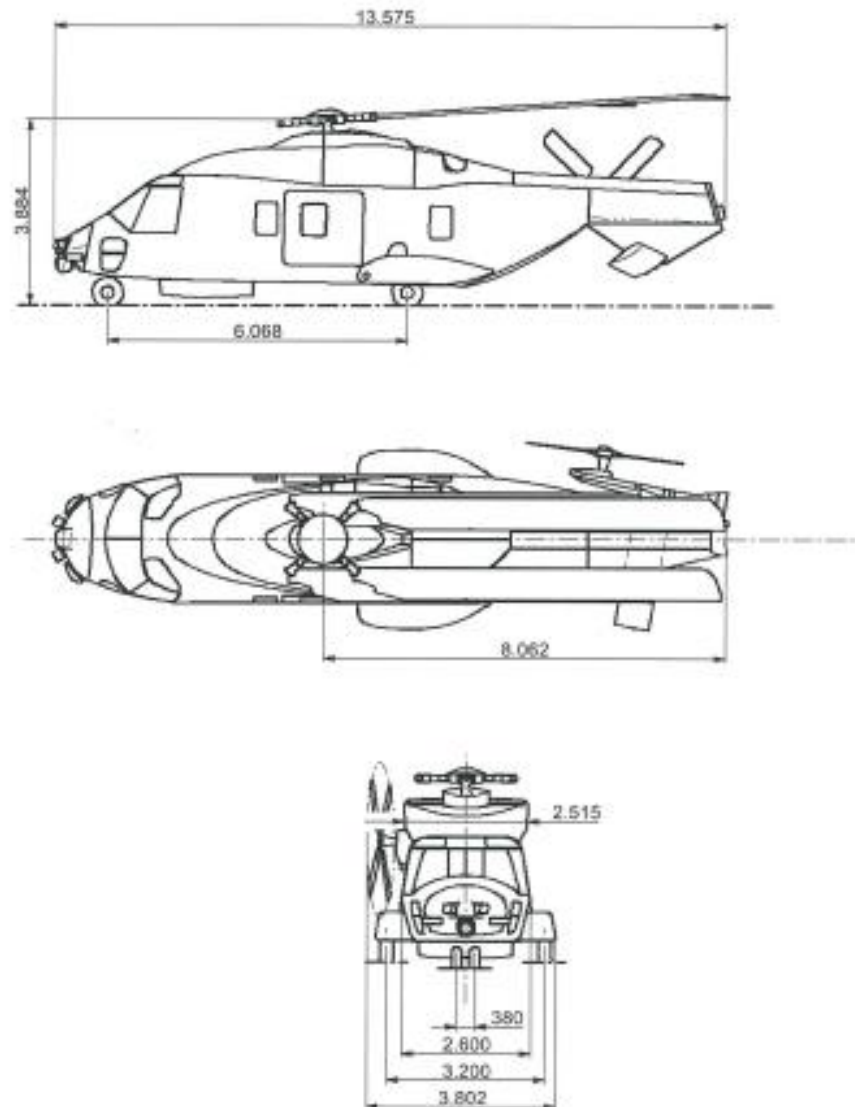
/2 : Principal dimensions - Tail and blades unfolded
